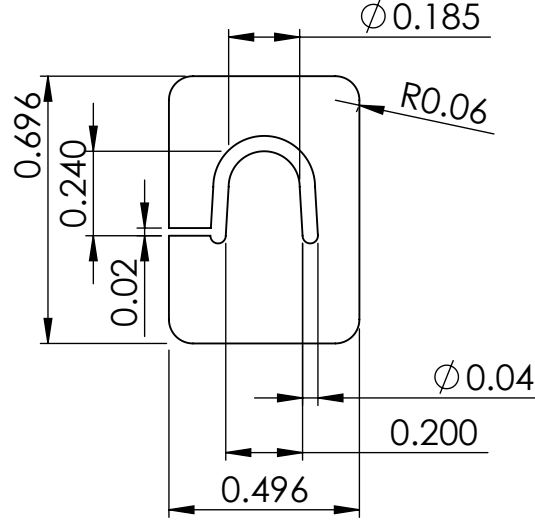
Single reed valve dimensions used within the reduced volume manifold EHA (Reproduced from [67]). All dimensions are given in inches. The thickness is 0.005" (0.13 mm).
